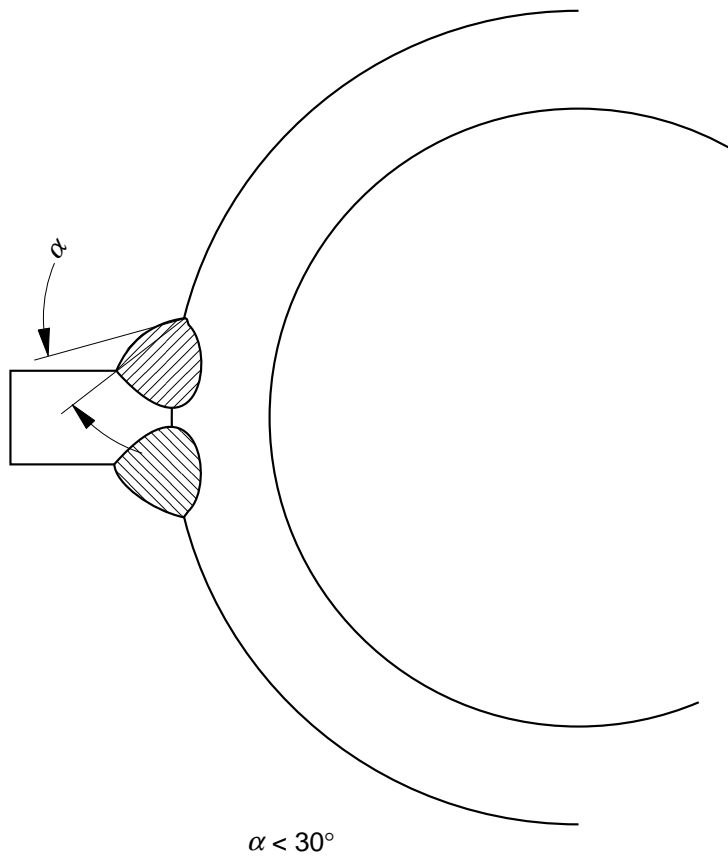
Allowable excessive convexity for fin to tube welds
